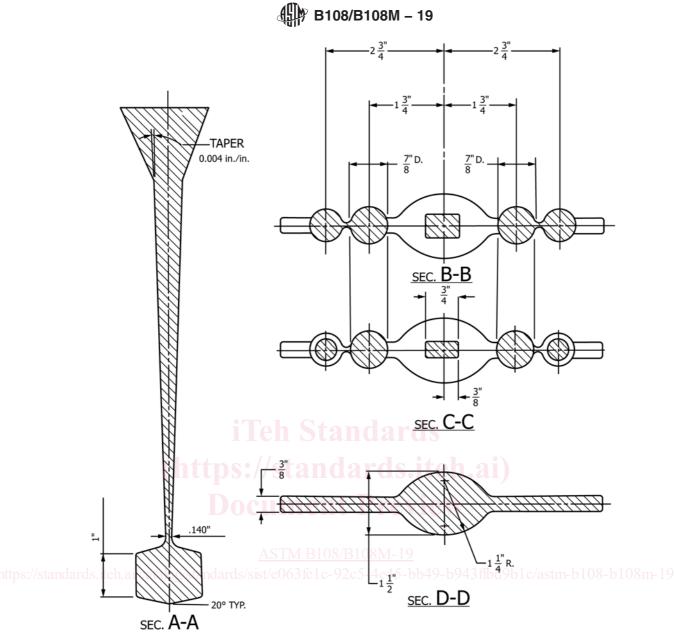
Tension Test Specimen Casting (Cross Section) (Inch-Pounds)
